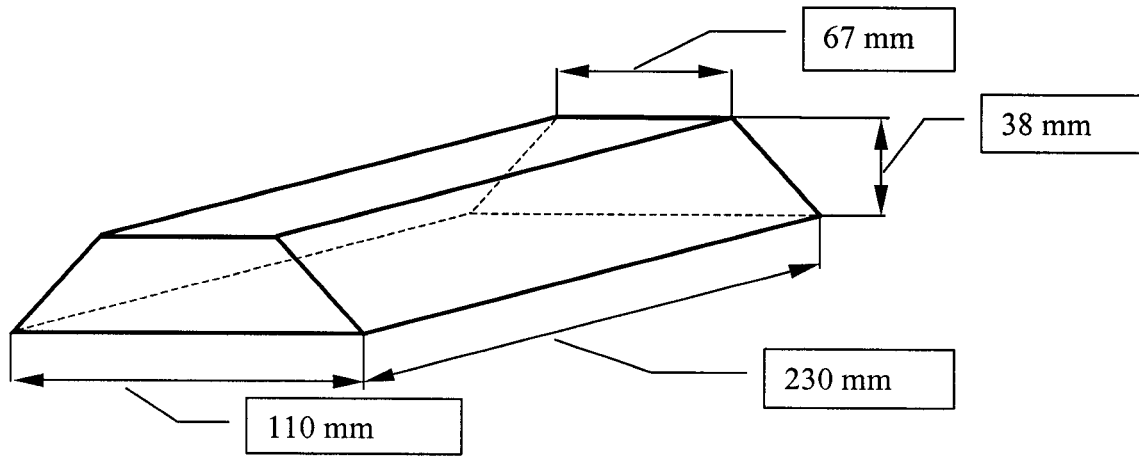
Shape and dimensions of a test specimen for rotary slag test
